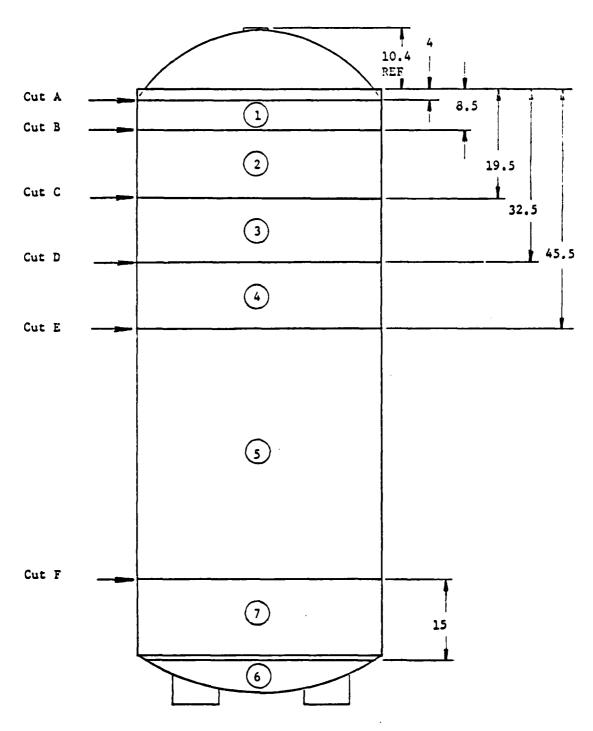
Dissection layout of Cuts, Locations and Section Numbers
